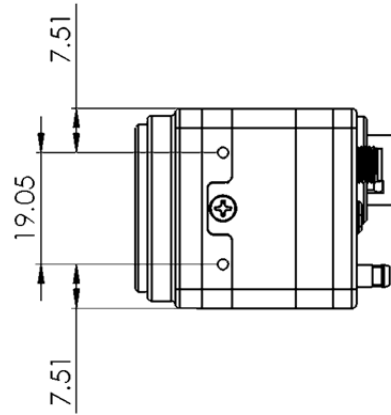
Tripod Mount Adapter 2-56 Mounting Location on top of NOCTURN XL (in mm)
